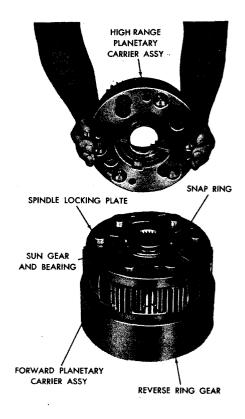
Assembling forward and highrange planetary carrier assemblies
